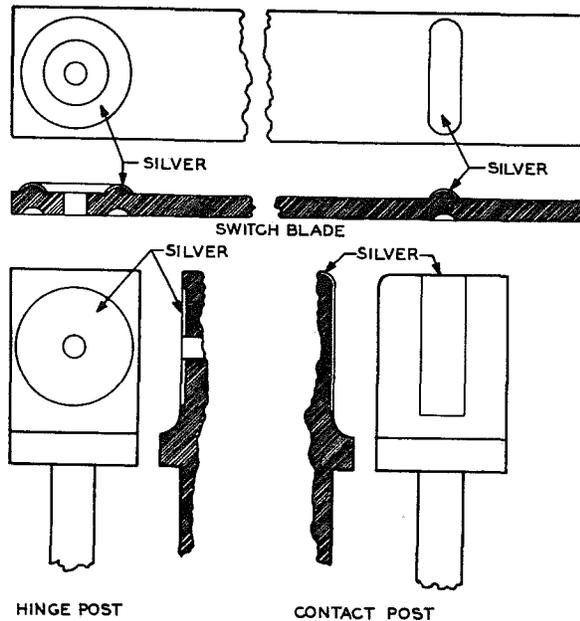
Illustrating Embossed Line Contact (LPI Switch with Silvered Contact Surfaces Shown)
